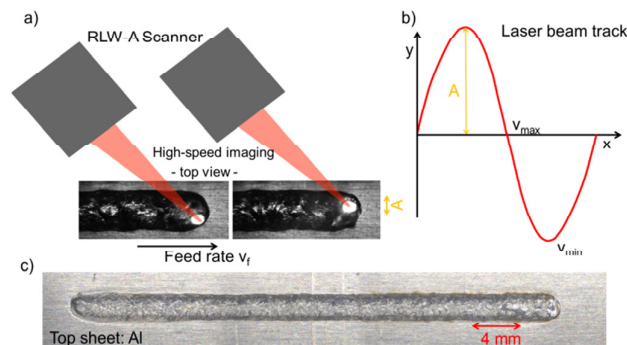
Exerymental setup (a), the sinusoidally scanned laser beam track (b) and the resulting weld seam (c) for $A = 0.5$ mm and $f = 600$ Hz.
